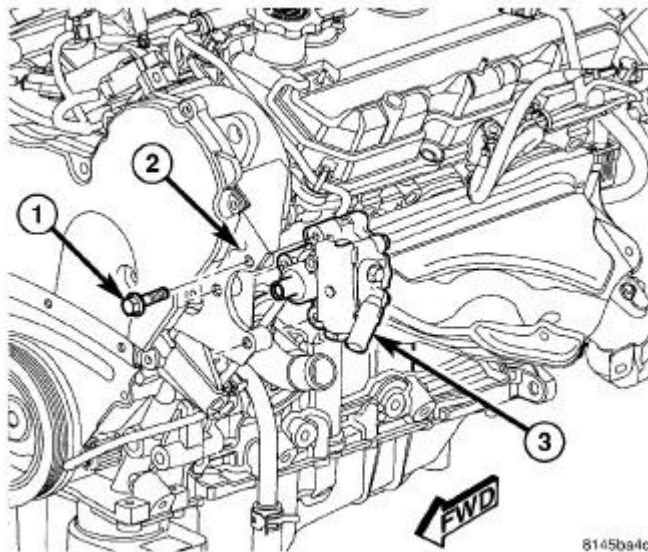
POWER STEERING PUMP - 2.7L/3.5L
